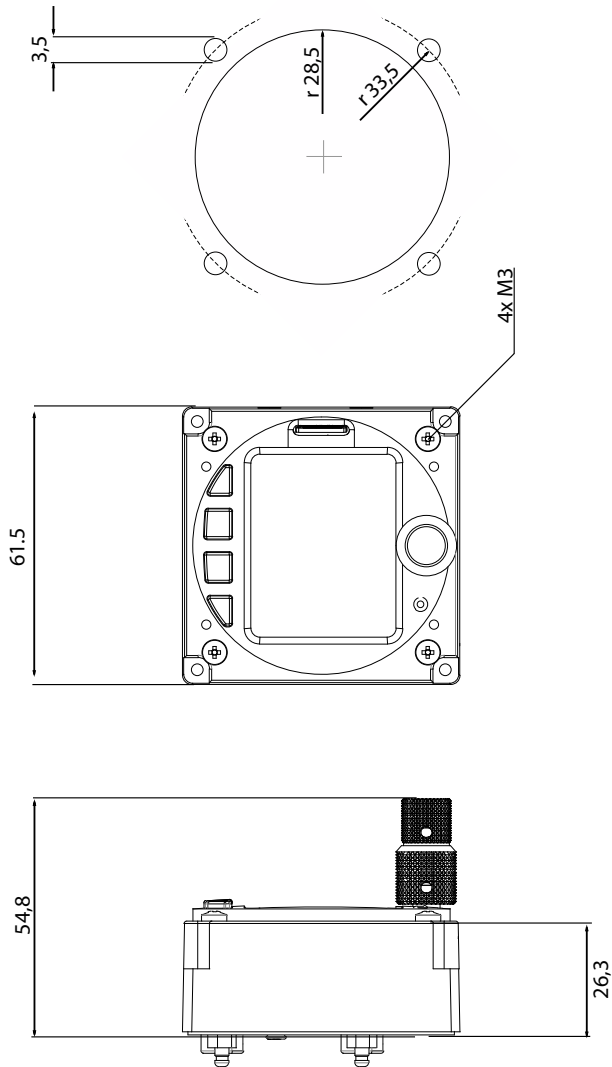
Dimensional drawing ATD-57, all dimensions in millimeters
